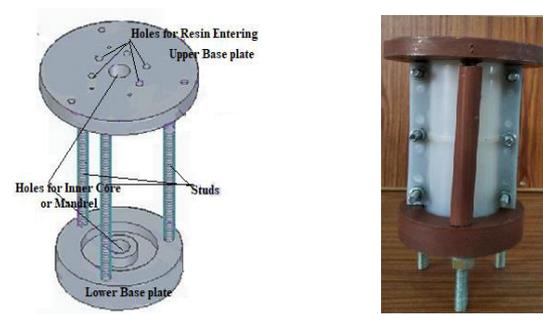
Fixture for Hollow cylinder with Lower and Upper base plates of Compression Cum Extruder Die Type Equipment
